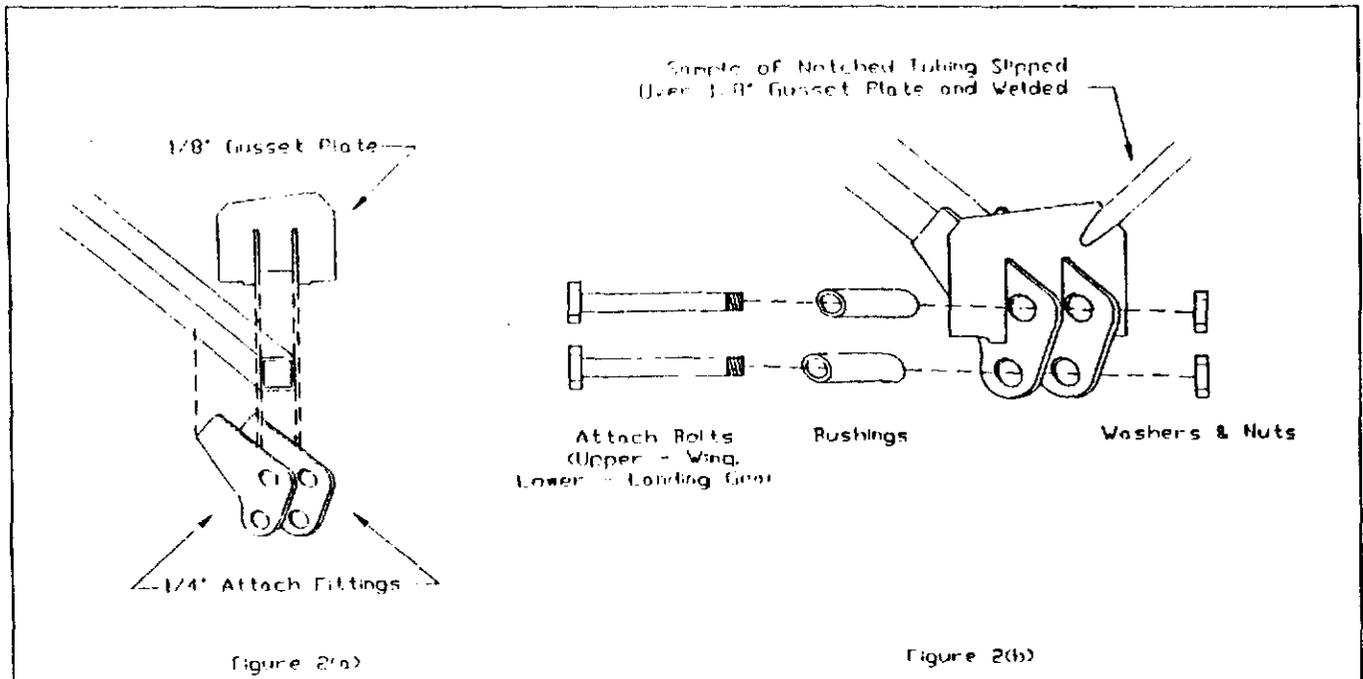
Simplified assembly drawings of SIC's new cluster design: (a) Fitting before welding; (b) Assembly of bolts, nuts, and bushing (wing forward spar, landing gear and fuselage tubing not shown.)
